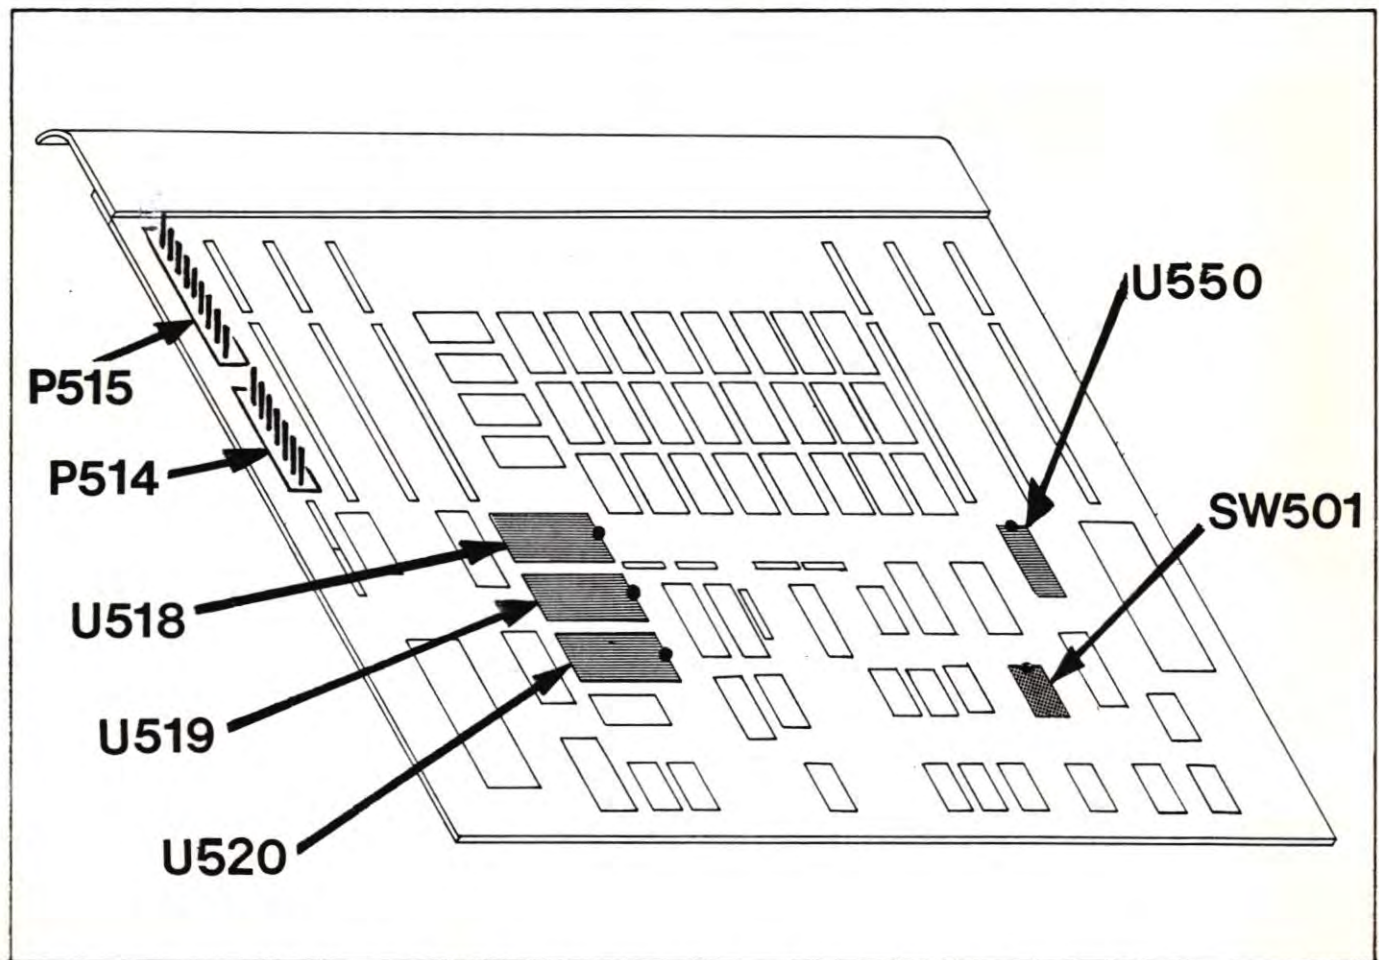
H/Z89 BOARD ROM LOCATIONS
